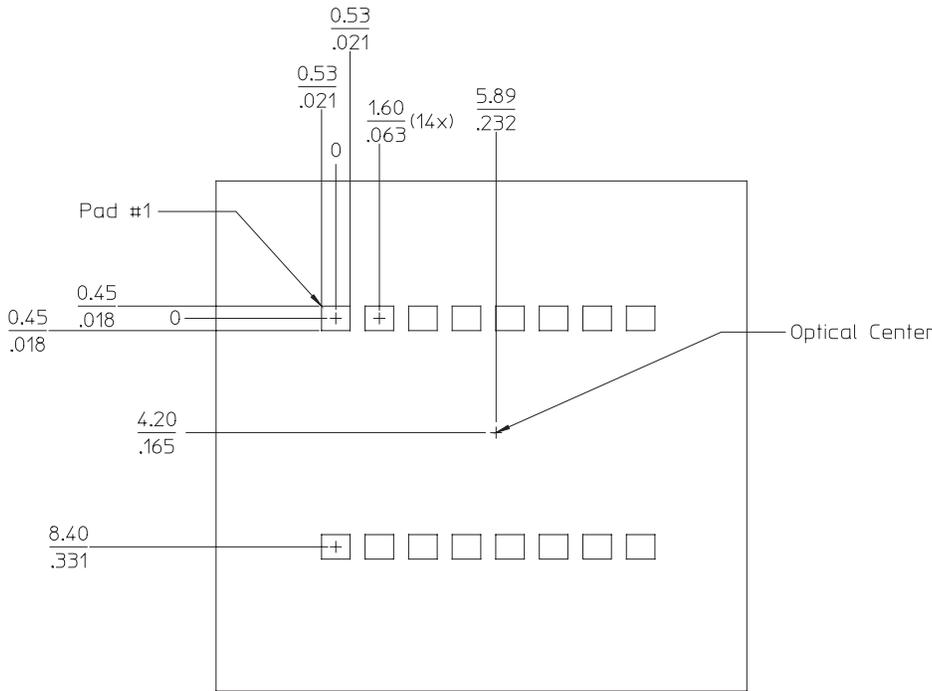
Customer PCB design for ADNS-3530 sensor (without cut-out)
